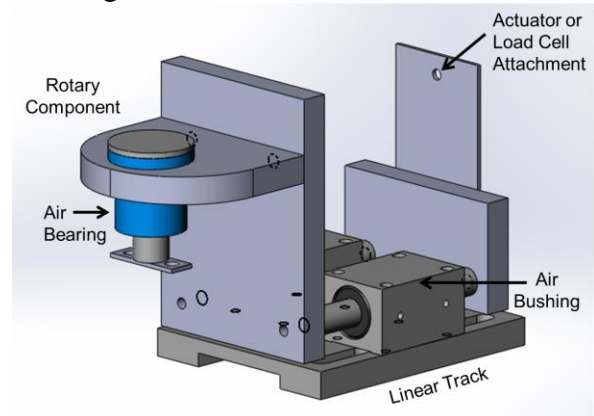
Solidworks drawing for new biaxial testing device design depicting a sled and track
